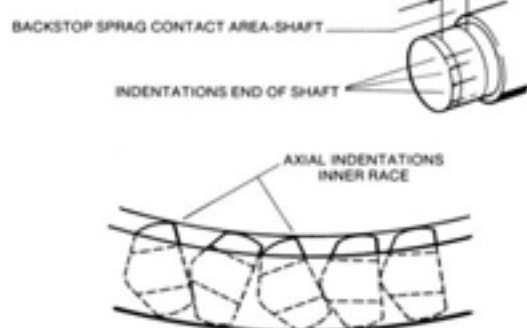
IMPROPER ASSEMBLY BACKSTOP TO DRIVE
